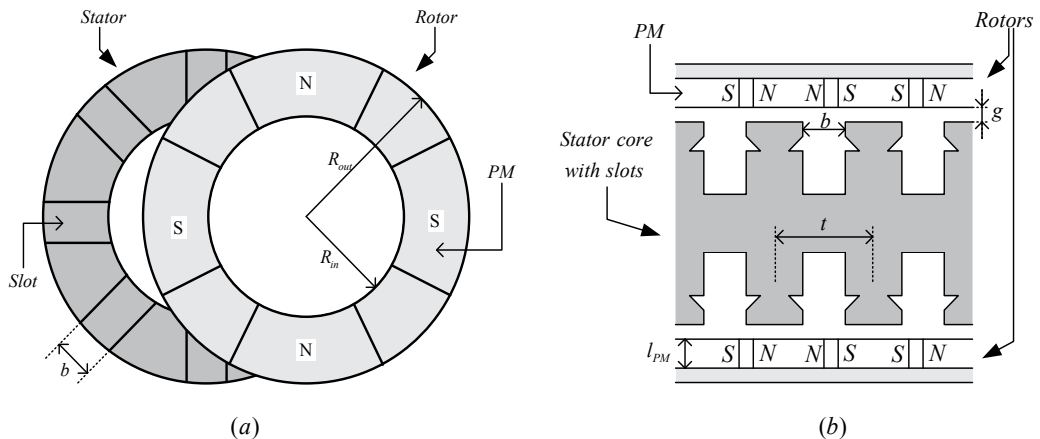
(a) Stator and rotor of an AFPM machine and (b) doubled-sided AFPM machine with internal slotted stator
